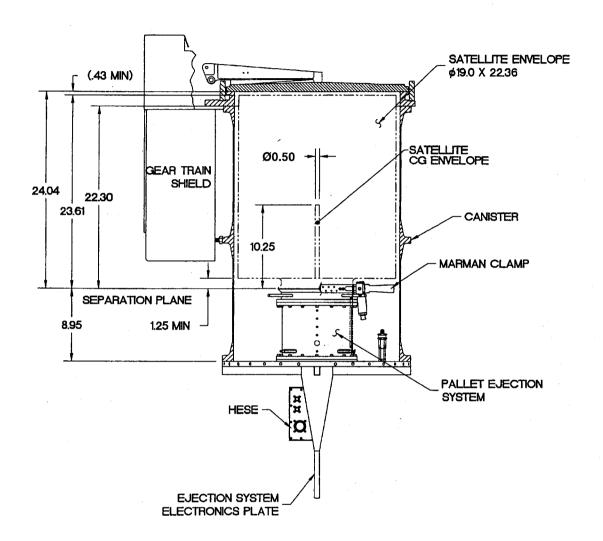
PALLET EJECTION SYSTEM WITH DOOR
